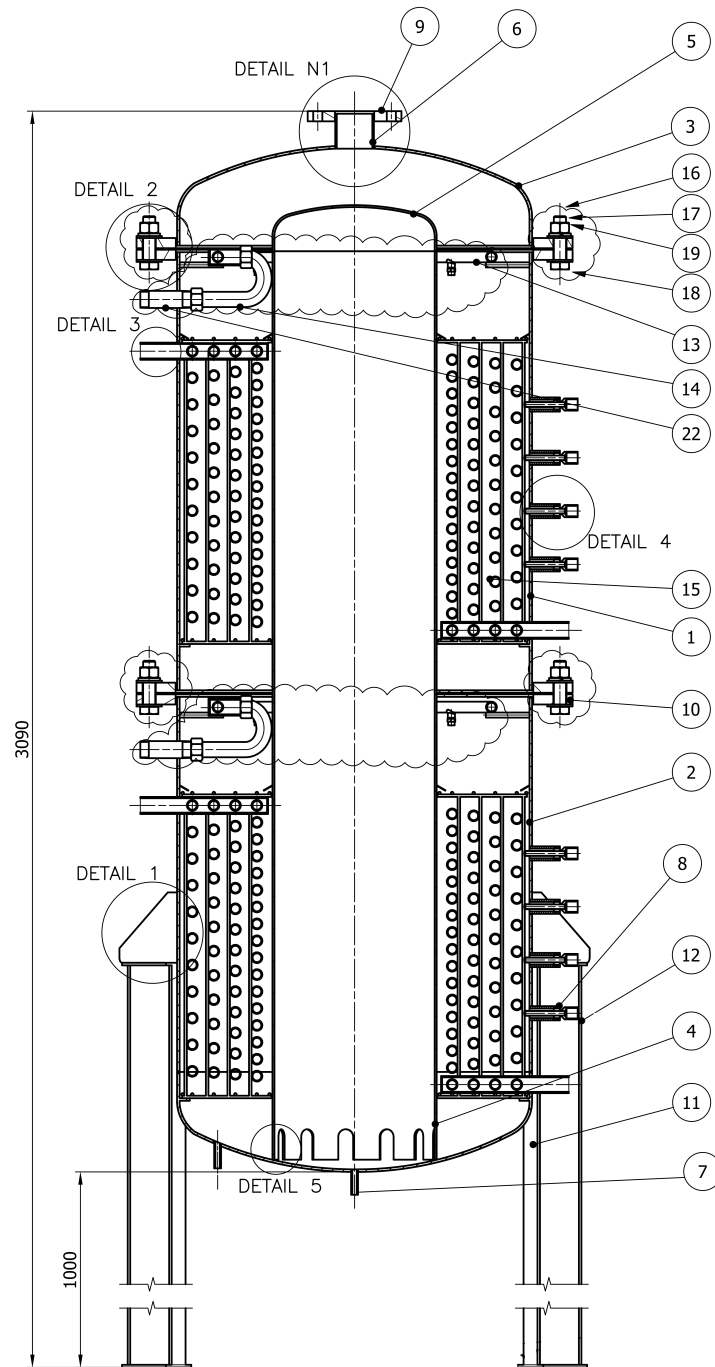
Front view on the drawing of absorber assembly (by CERBET)
